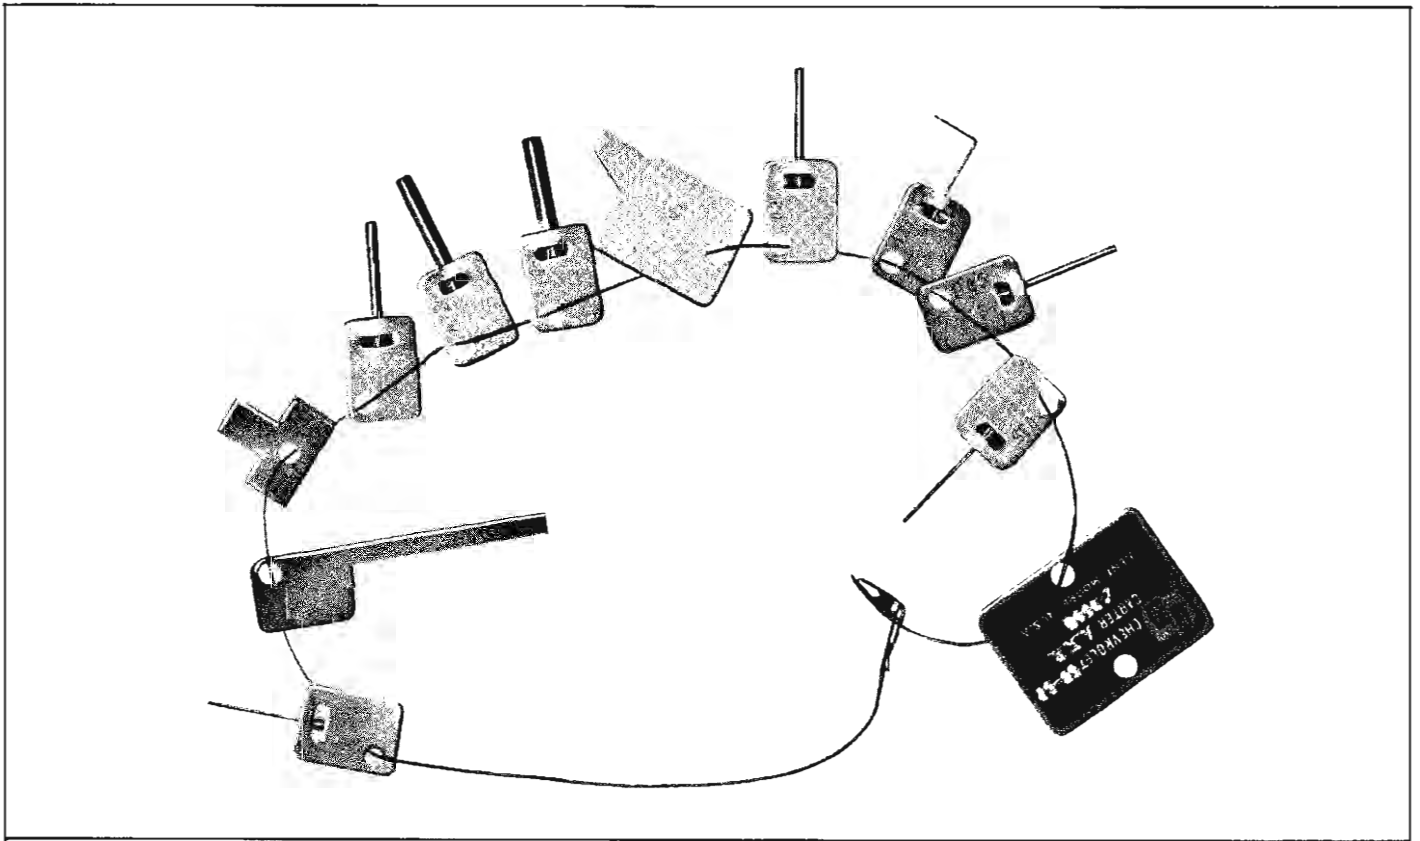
AFB Carburetor Chain Gauge, J-9550
